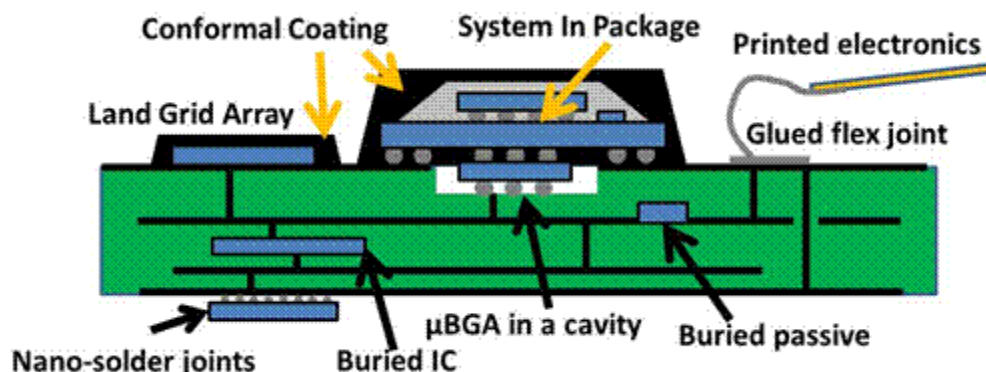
Board design with 3D designs, glued joints, buried electronics (Courtesy of Nokia)
